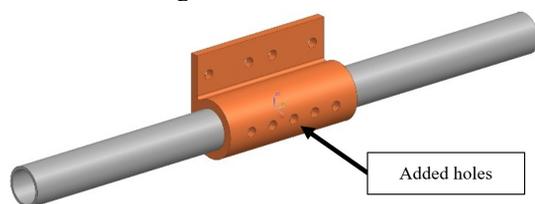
Holes added on the copper block to check the quality of the brazed joint.
